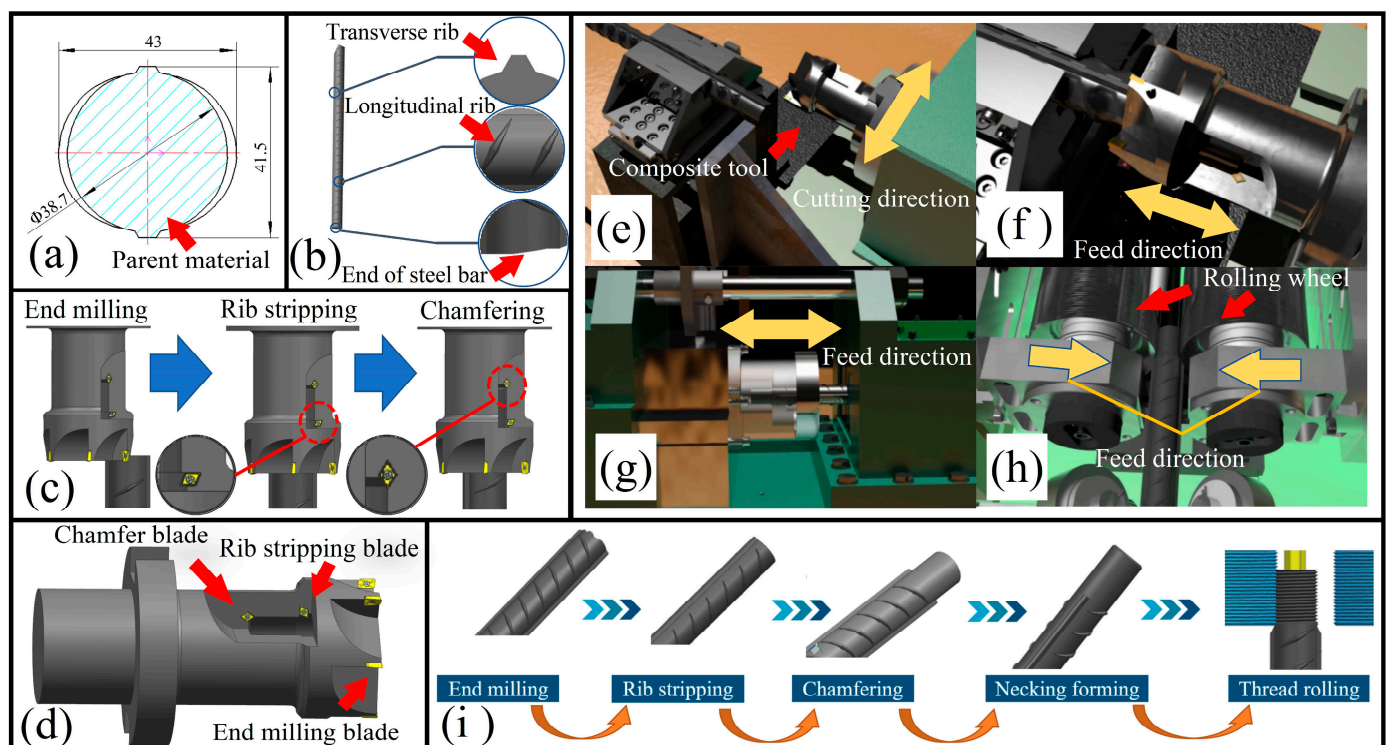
Technical process of machining. (a) Workpiece section diagram. (b) External surface of steel bar. (c) Machining process of the composite tool. (d) Composite tool model. (e) Process of face milling. (f) Process of rib stripping and chamfering. (g) Process of necking formation. (h) Process of thread rolling. (i) Changes process of steel bar.
